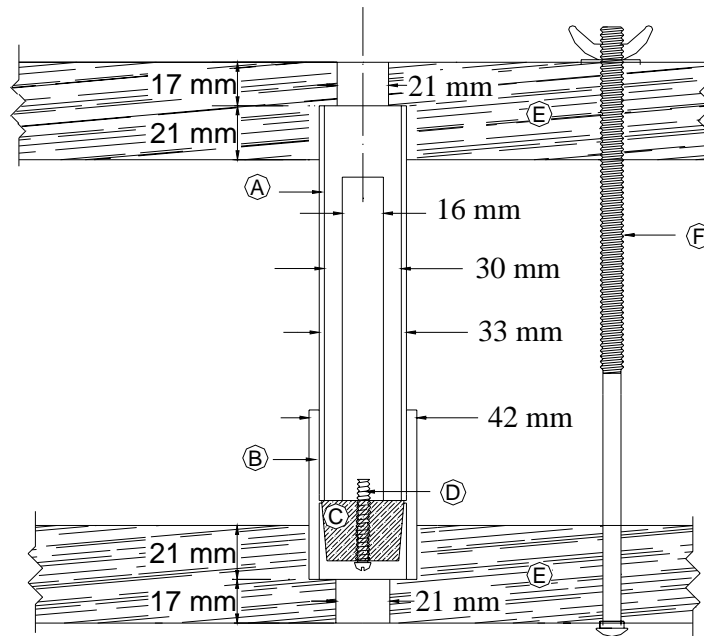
Mold assembly for mortar-wrapped specimens
